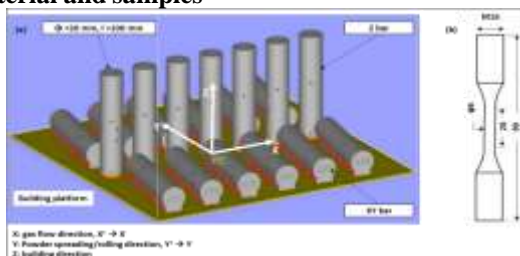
(a) Position and orientation of bar, (b) machined fatigue test specimen
